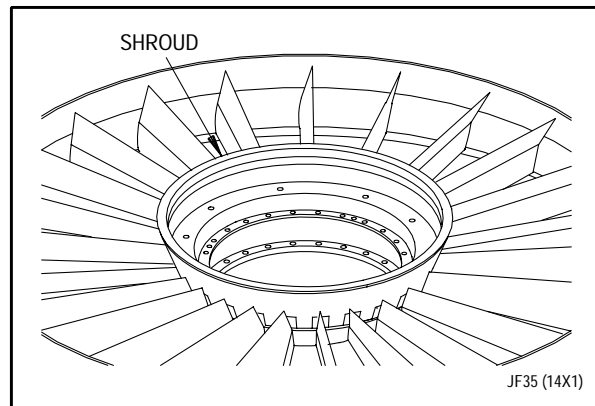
Front Compressor Stator Inlet Shroud - Installation
